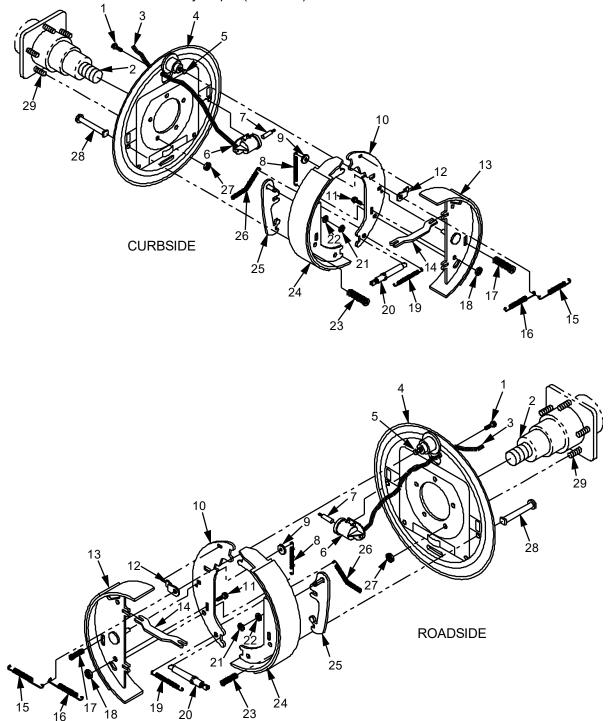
Wheel Cylinder, Brake shoe, and Backing Plate Removal/Clean and Inspect/Replacement.
